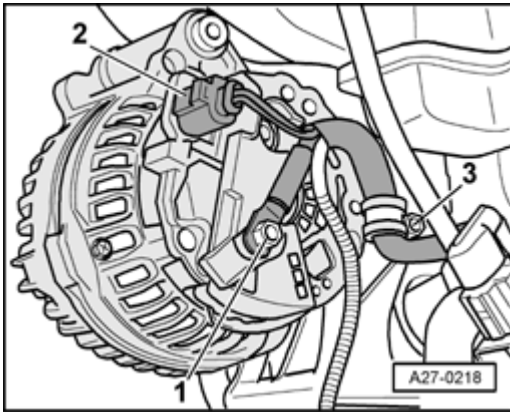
Identifying Connector, Electrical Wire And Wiring Clamp On Generator
